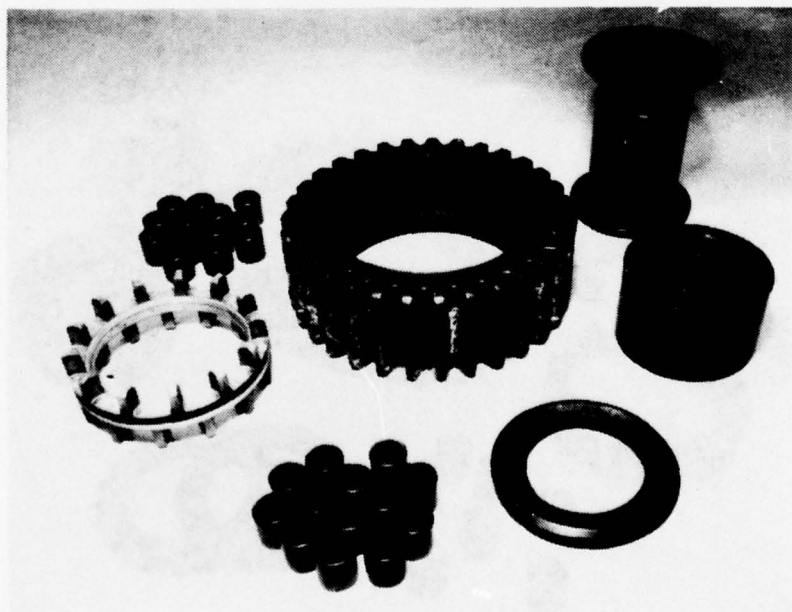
Upper planetary pinions, bearing inner race, rollers, retainer, and roller guides after fourth loss-of-lube test.
